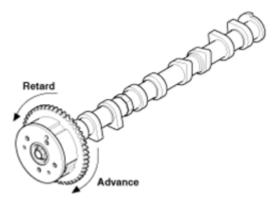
Identifying Retard Hole Courtesy of KIA MOTORS AMERICA, INC.
